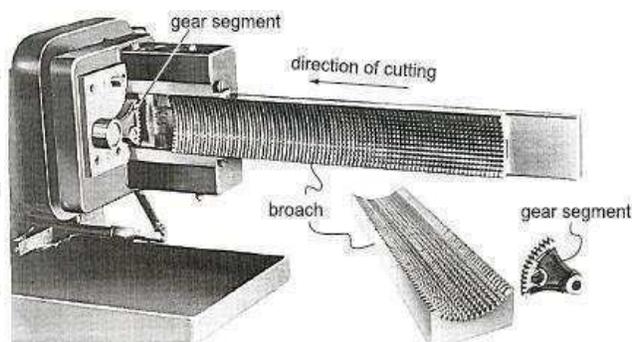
(b) Broaching the teeth of a gear segment by horizontal external broaching in one pass
